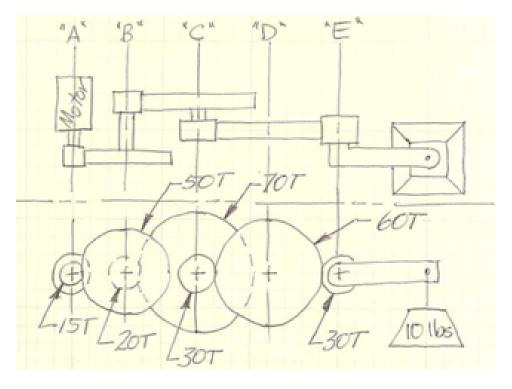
Top and side views of a geartrain. The 30T output gear that is at shaft E is connected to an arm that, in the horizontal position shown, has a moment arm of 8 inches.
